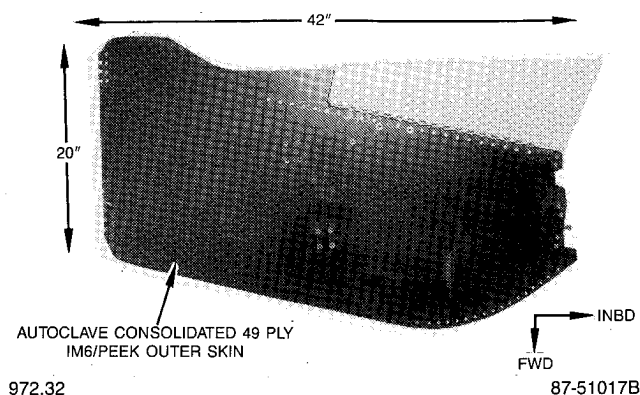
TPC OUTER SKIN OF THE F-5E MAIN LANDING GEAR DOOR
